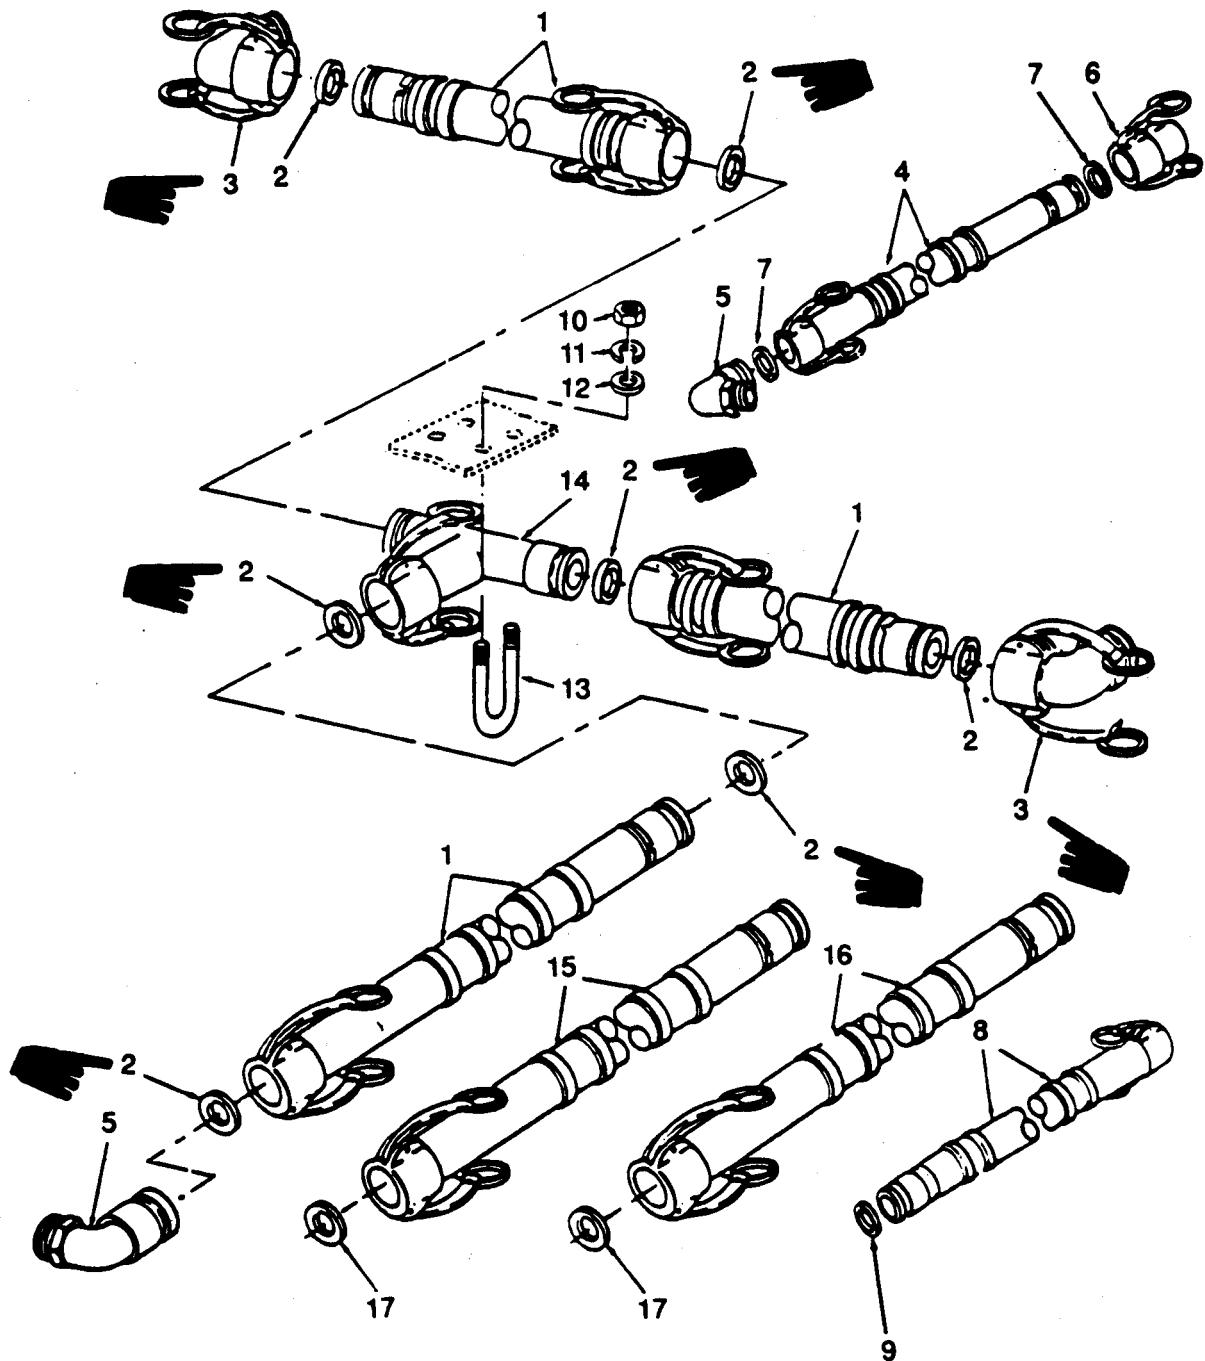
Hose Assemblies, Elbows and Tee Inlet and Outlet (Sheet 2 of 2).
